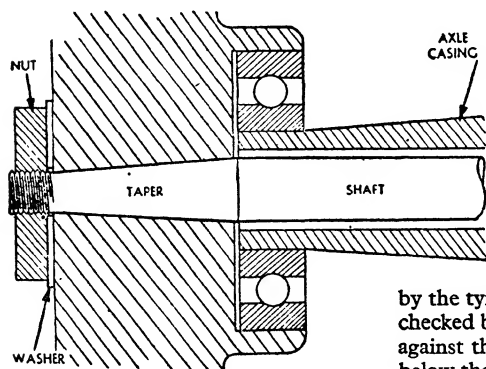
Shaft and casing each bear part of the load in the present-day three-quarter floating-axle assembly.
